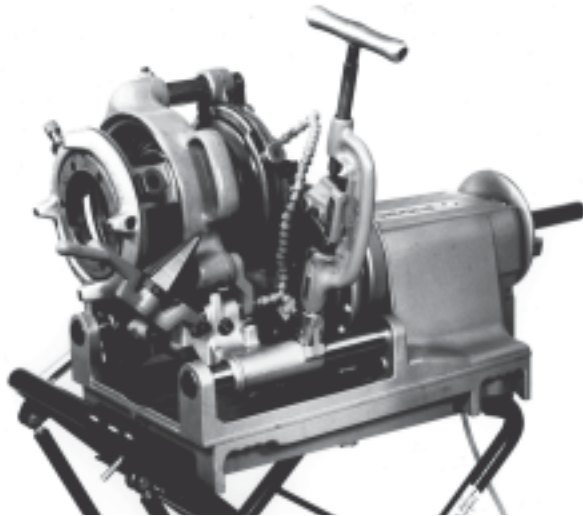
No. 141 Geared Threader Mounted to 300 Compact
